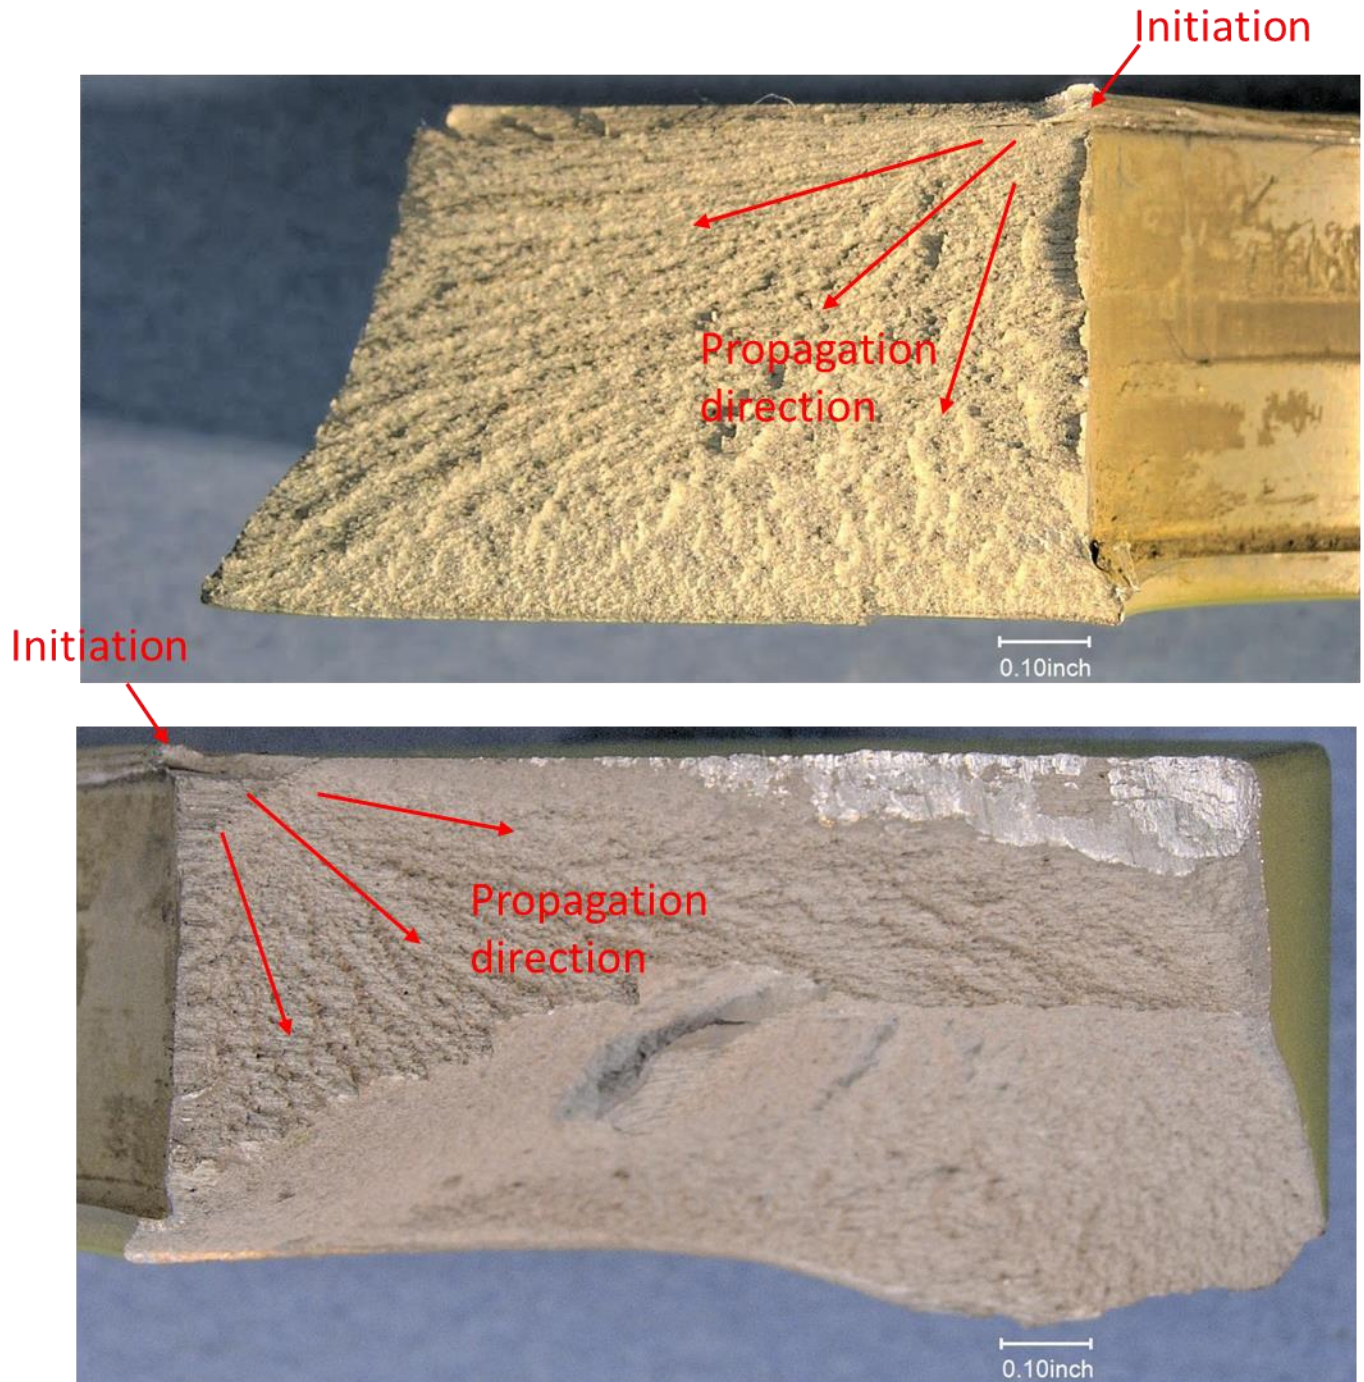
Higher magnification images of the fracture surfaces on the piece of overhead bin vertical tie rod attach. The areas of fracture initiation and crack propagation direction are indicated in the images.
